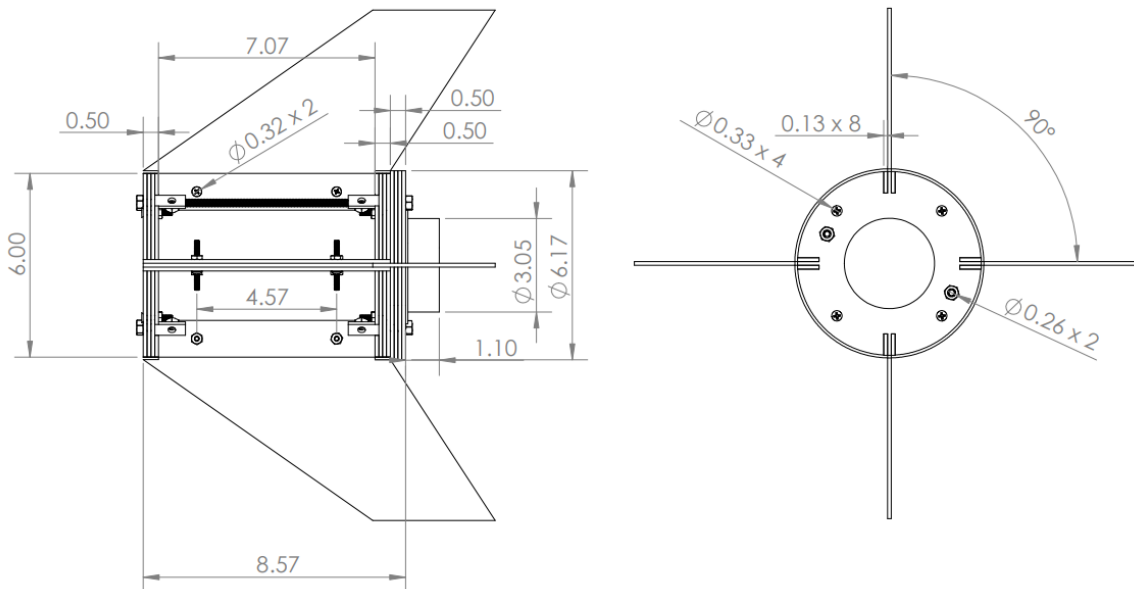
Dimensioned CAD drawing of the removable fin system.
